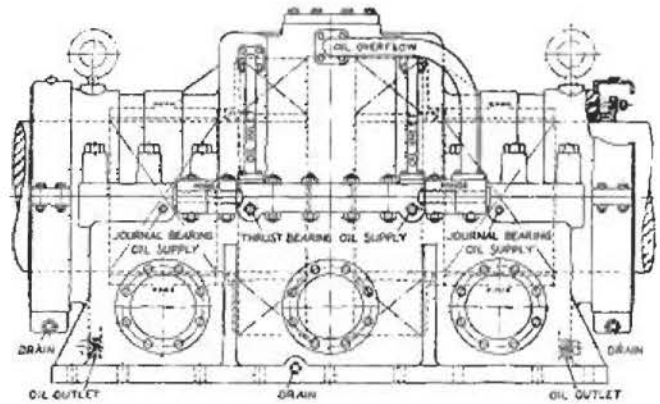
Marine mounting for two journal bearings and a double Kingsbury Thrust Bearing. Collar is integral with shaft. Forced lubrication is used. Designed for propeller shafts of 705-foot, 30,000-ton, twin-screw transatlantic liners. STANDARDIZED: See Bulletin G-1.
